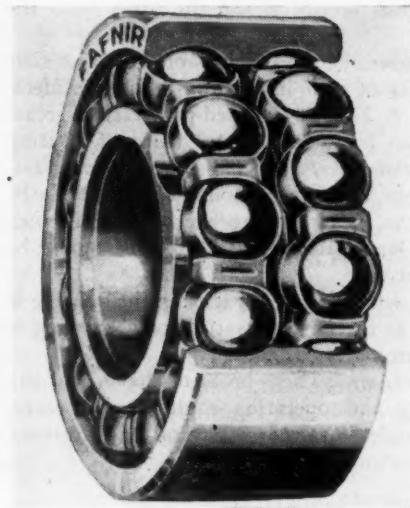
DOUBLE-ROW DEEP-GROOVE BALL BEARING WITH PRESSED-STEEL RETAINERS
